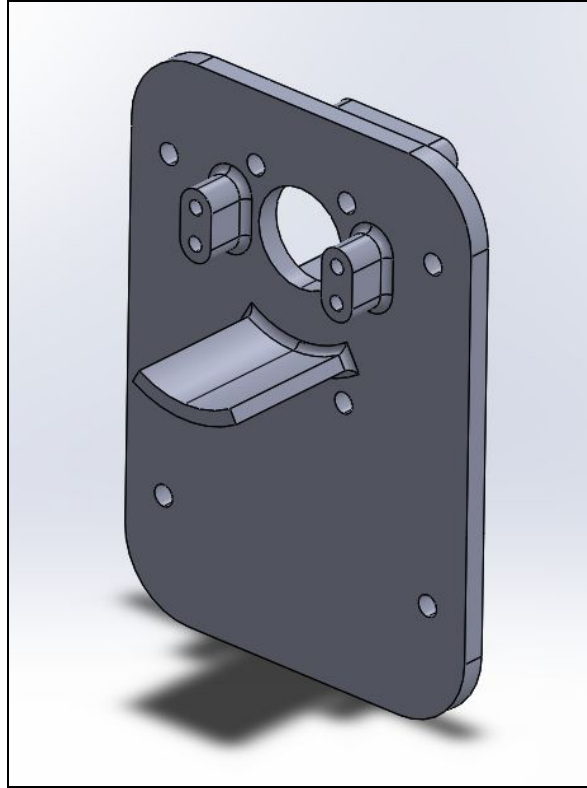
Mount for worm gear motor that controls the sun/moon beam, designed for 3D printer
